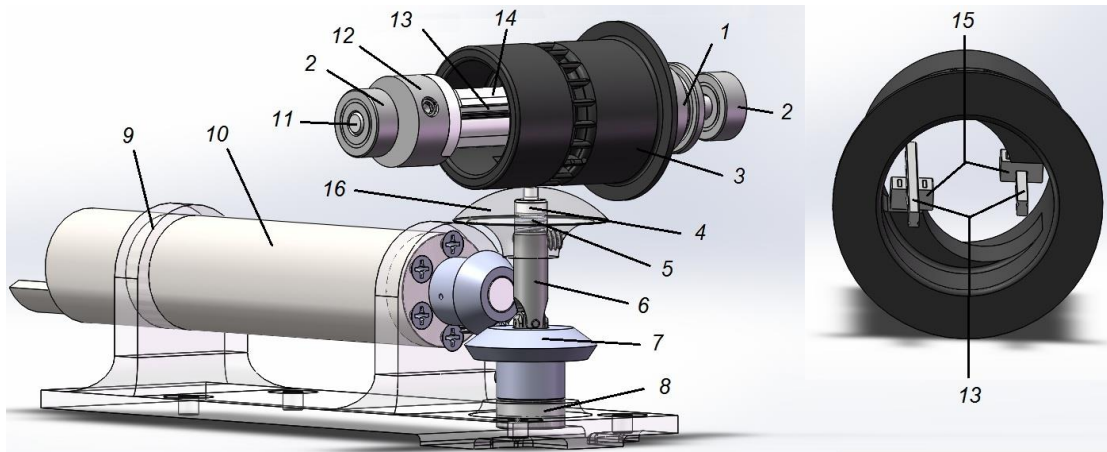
The CAD model of the first-generation MMS. 1 and 12. shaft collar, 2 and 8. ball bearings, 3. output shaft, 4. holding pin, 5. compression spring, 6. universal joint, 7. bevel gear set, 9. supporting base, 10. brushless DC motor (BLDC), 11. Steel shaft, 13. linear rail guide, 14. rail guide support, 15. ball bearing carriage, and 16. hemispherical disc.
